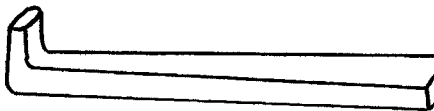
The armrest is a smooth steel shaft about 7- to 9-in. long. that can be fit into a handle. The left hand grasps the tool rest and the left thumb presses the tool down onto the armrest and the entire assembly down onto the tool rest. The tool rests against the hook on the armrest so side pressure can be applied as threads are cut.
